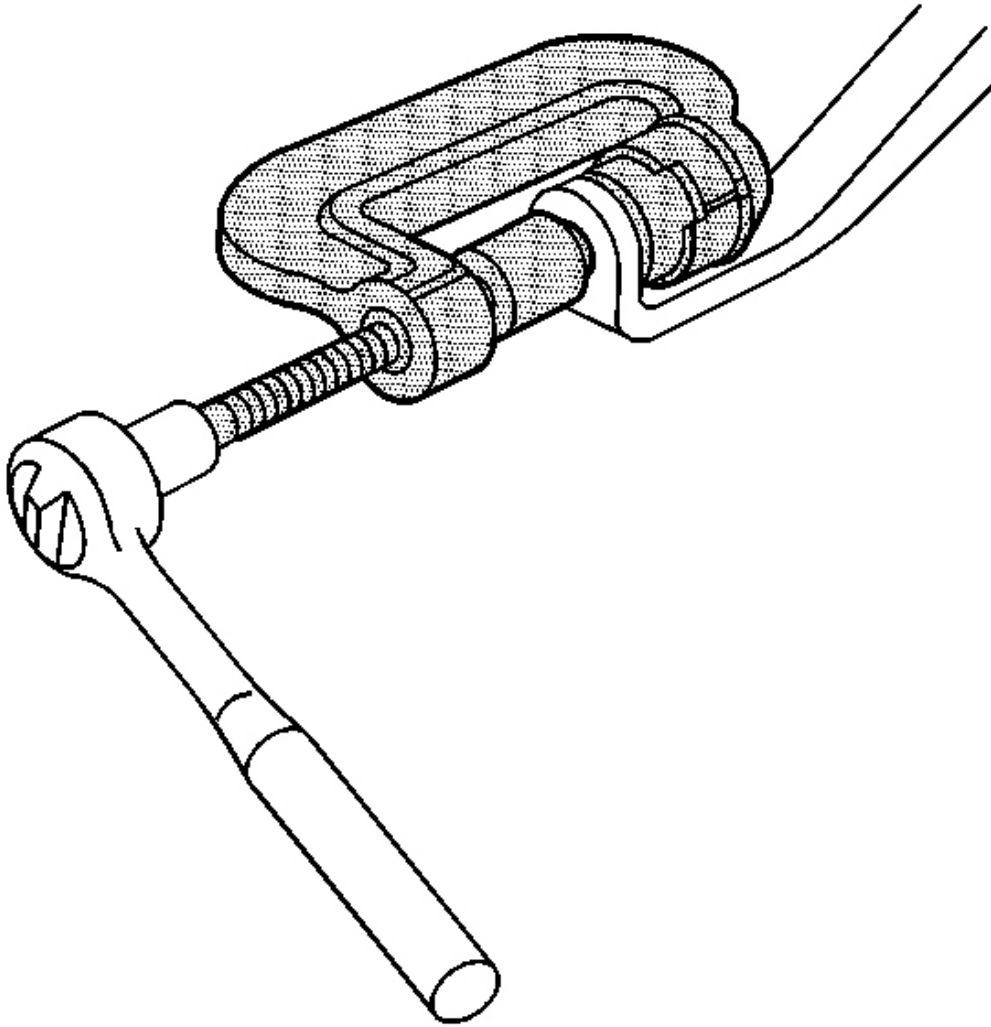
View Of Upper Ball Joint Retaining Clip
